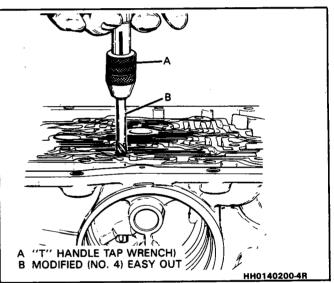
Removing Third Accumulator Retainer and Ball Assembly
